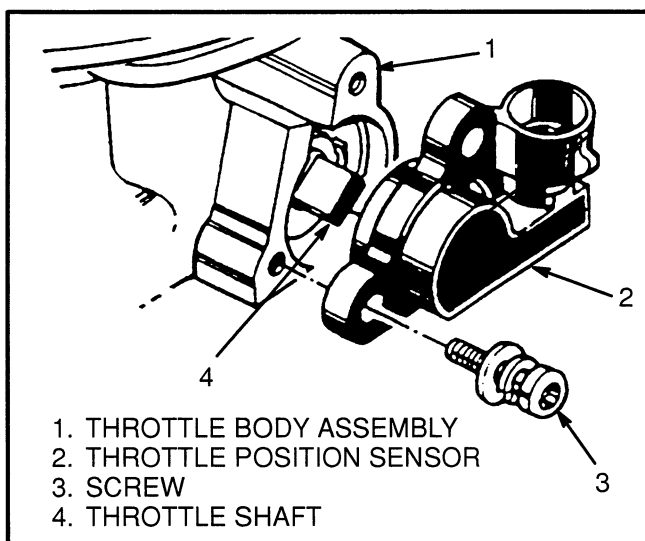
THROTTLE POSITION SENSOR (TPS)
